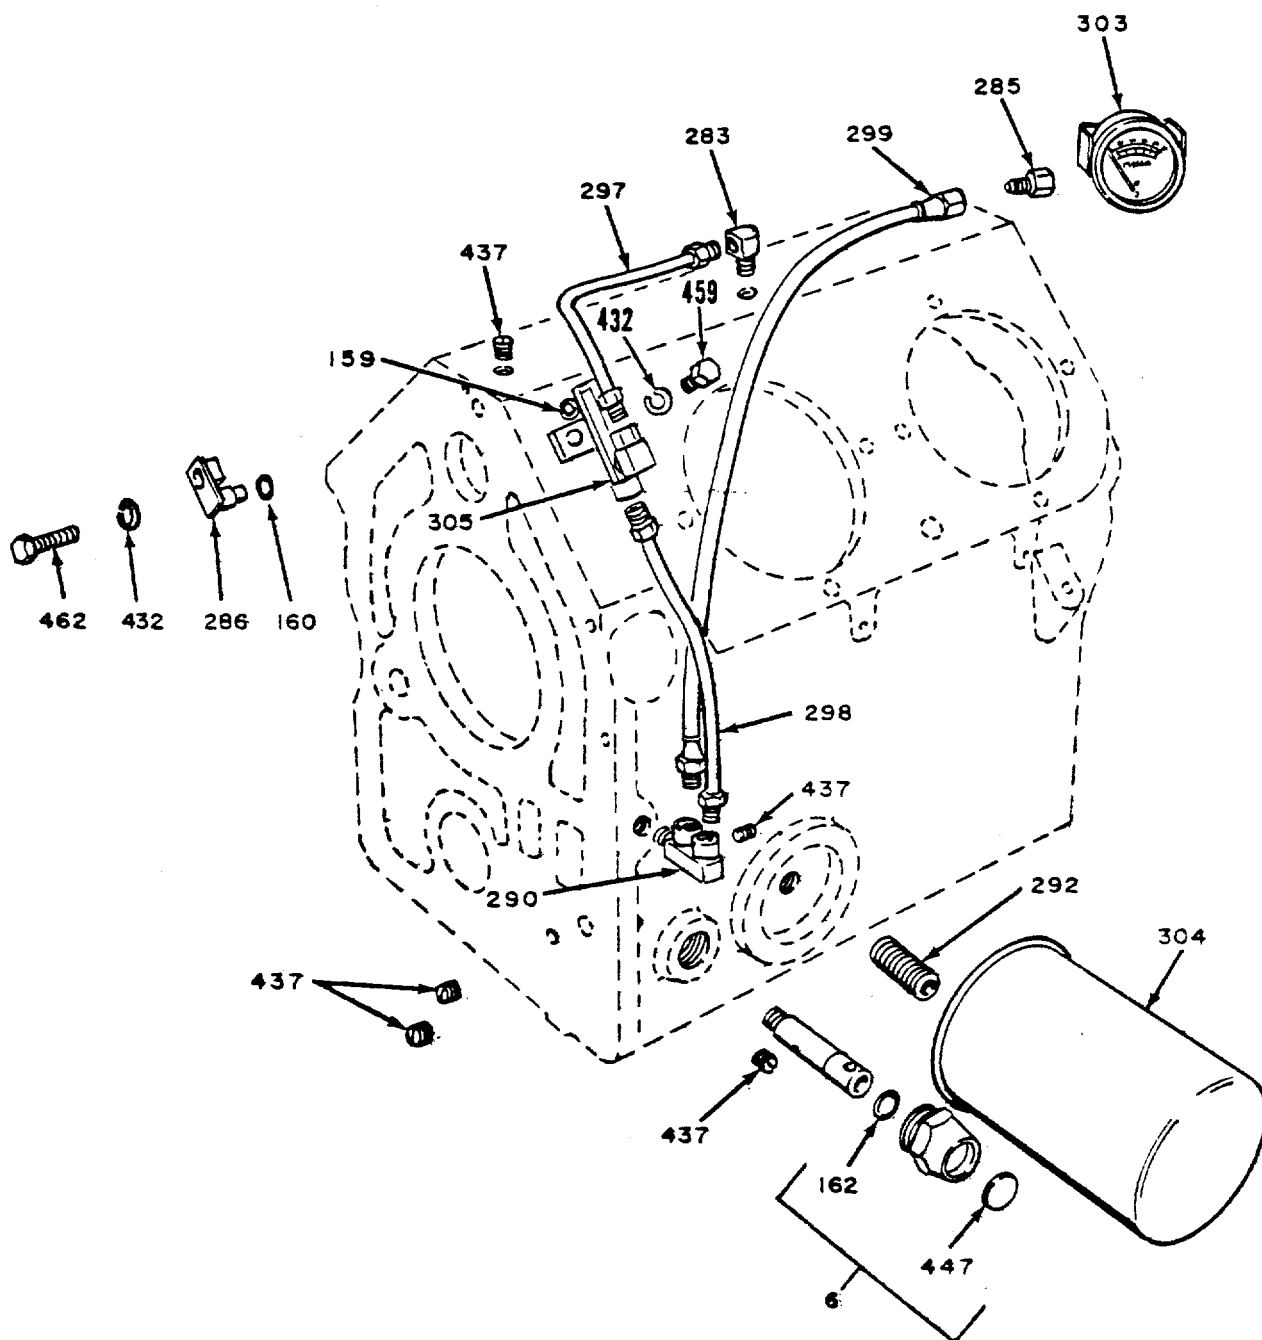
Ref. No. 165, OIL PUMP ASSEMBLY
